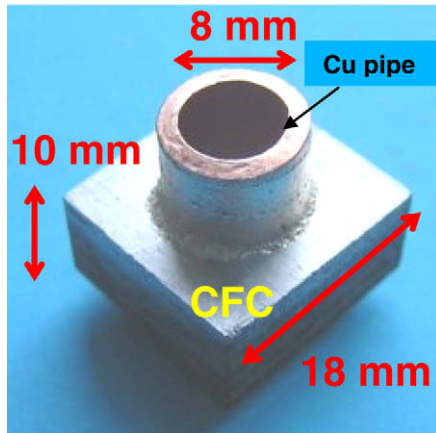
CFC/Cu monoblock sample manufactured by one-step brazing process.
